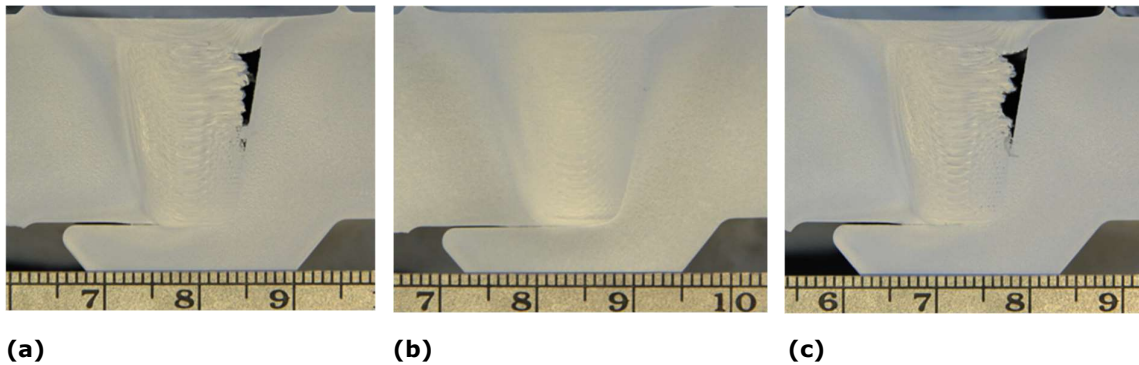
3_Gap_23mm weld macrography at (a) start, (b) middle, and (c) end
